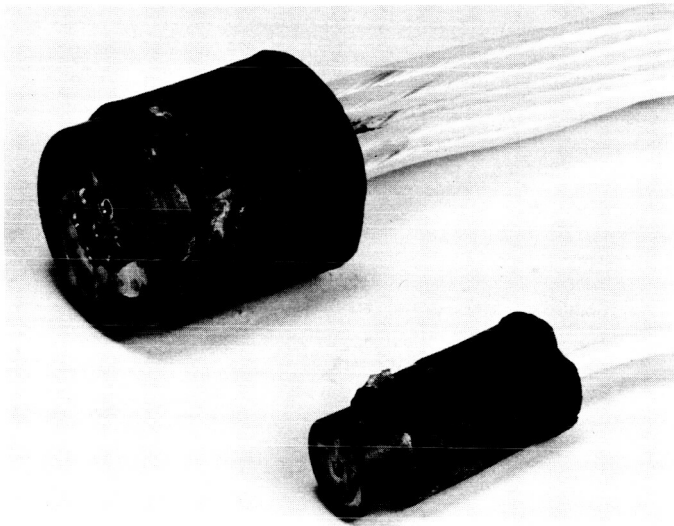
Potted connectors after removal showing fractured glass from mating hermetic seal and extensive voids
